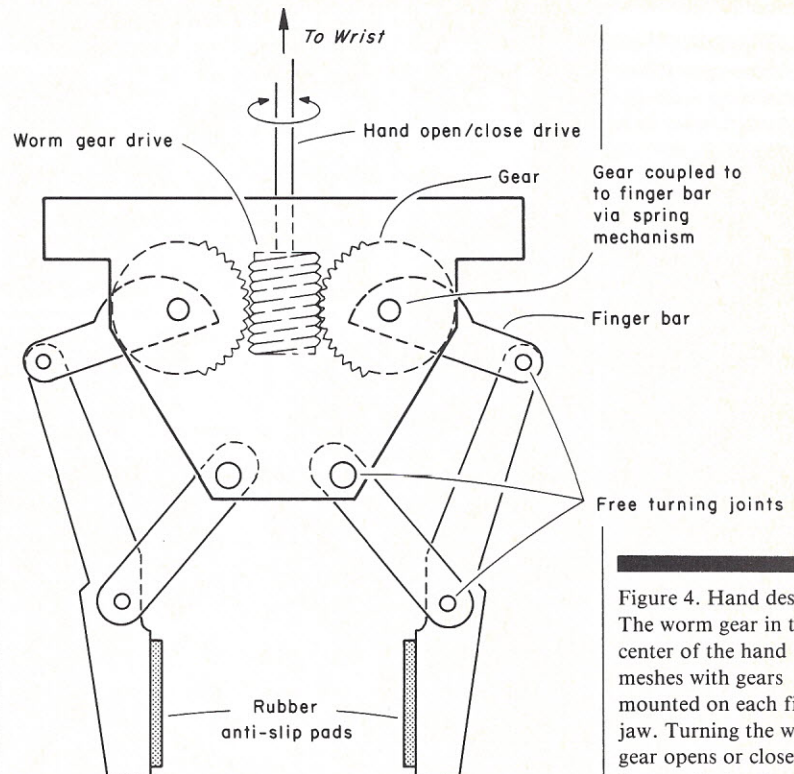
Hand design. The worm gear in the center of the hand meshes with gears mounted on each finger jaw. Turning the worm gear opens or closes the fingers via a spring coupling.
